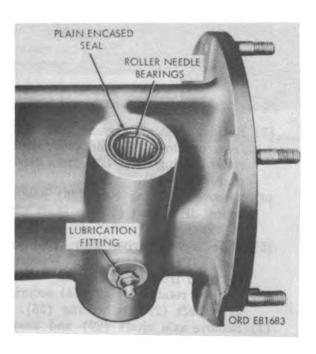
Removing or installing plain encased seals, roller needle bearings, and fitting.
